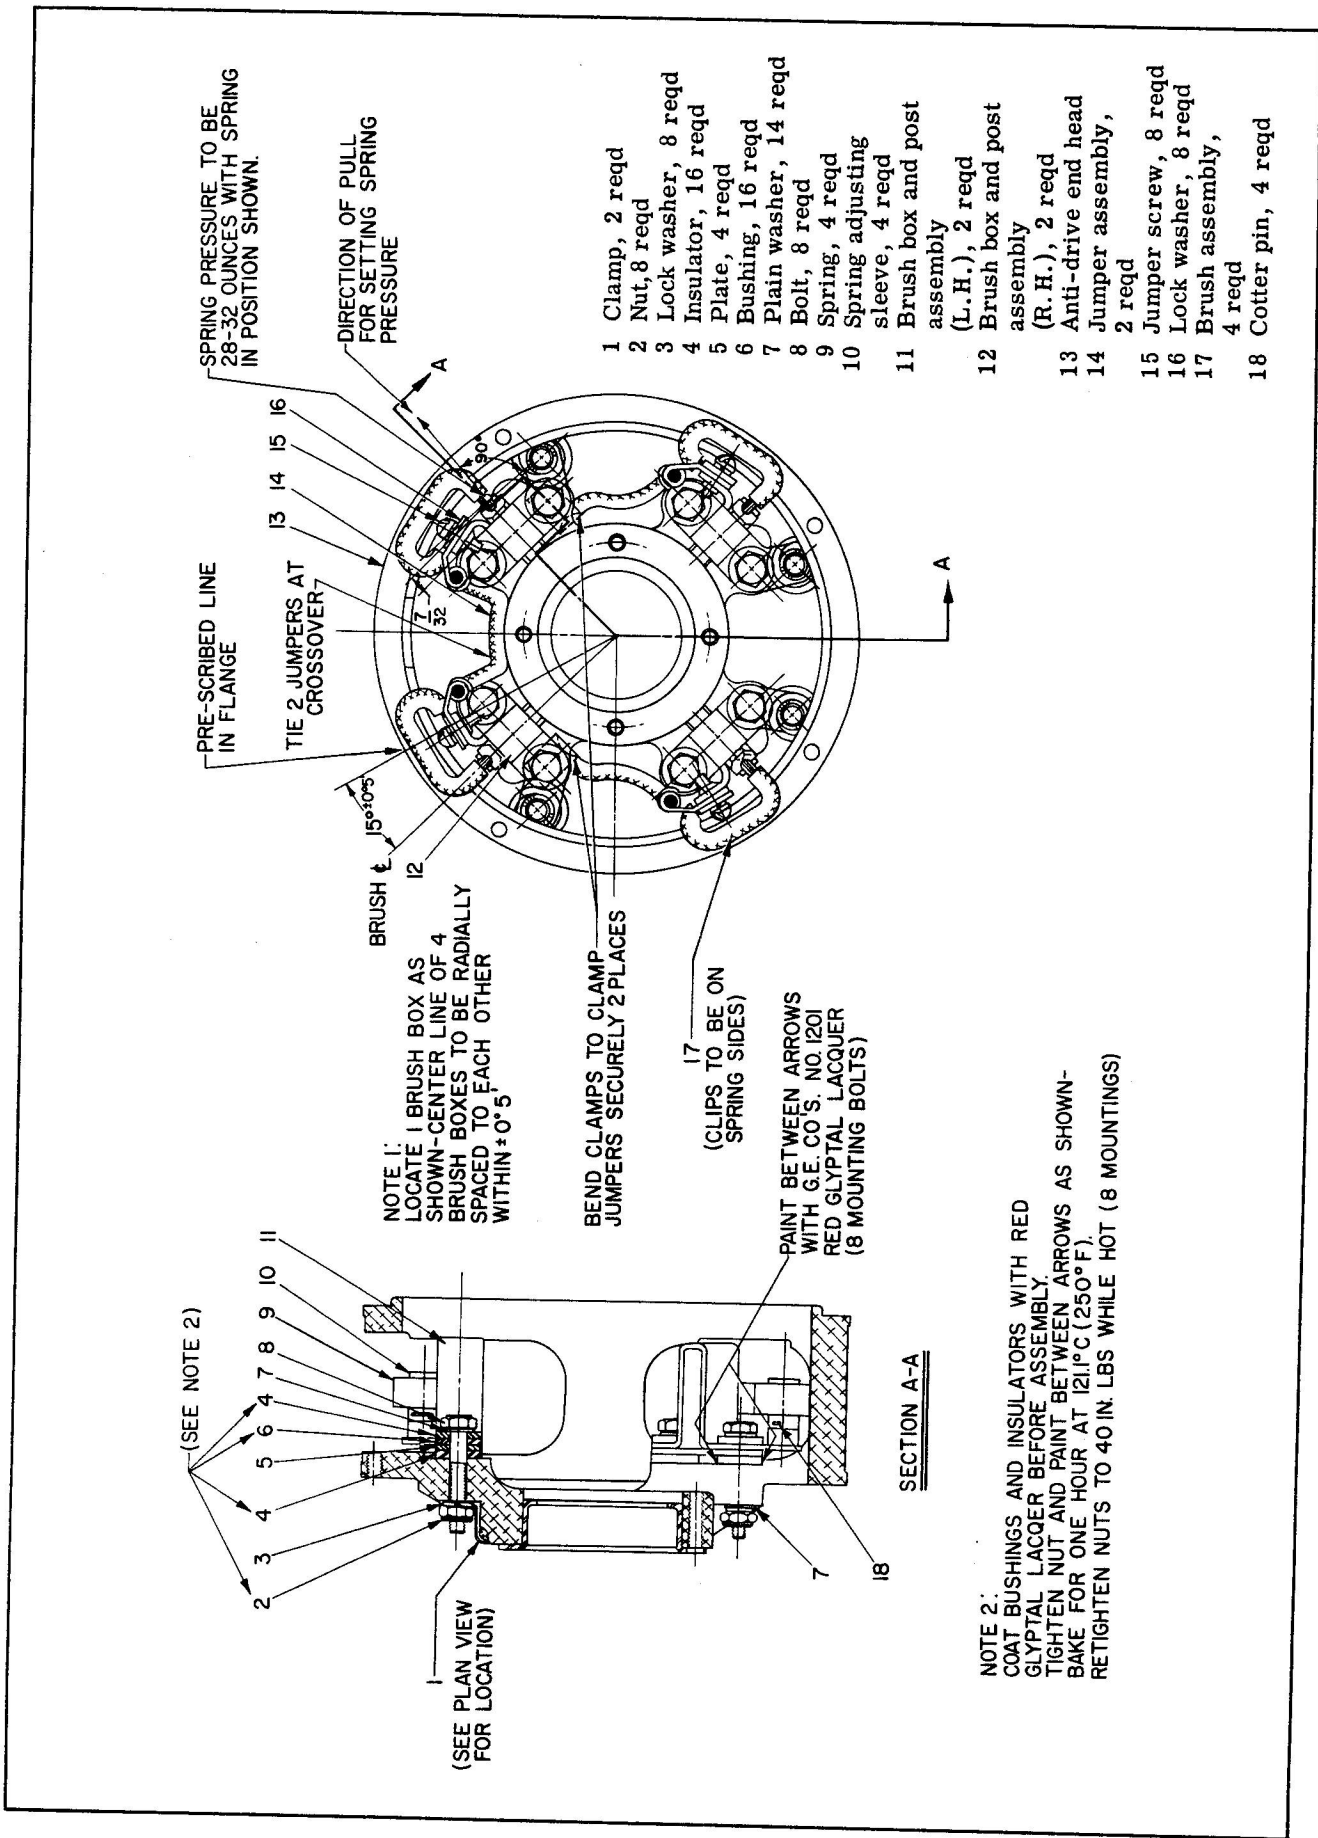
Anti-Drive End Head Assembly with Jumpers and Brushes Assembled
